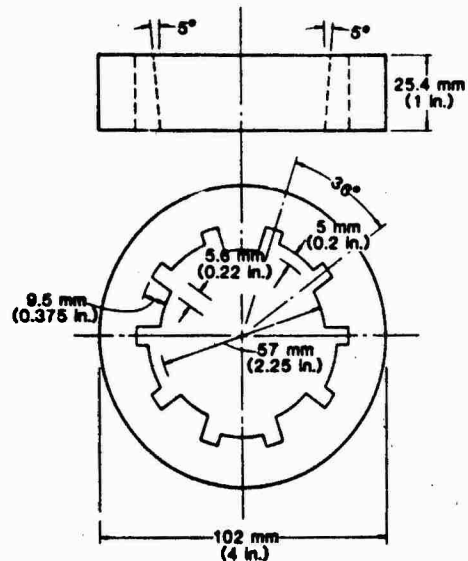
CUTTER FOR MULTIPULSE EXCITATION
